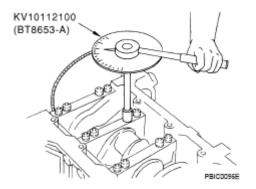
Checking Tighten Angle Of Main Bearing Cap Bolts
